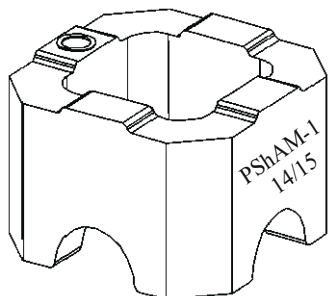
One shape of molded packing for the glass furnace regenerator.
